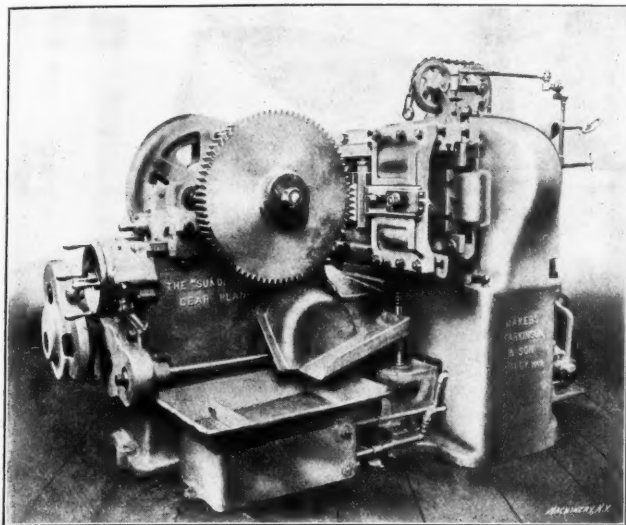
The Sunderland Patent Spur Gear Generating Machine
